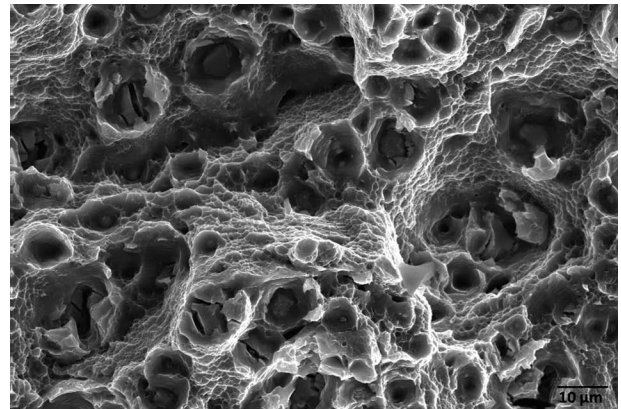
Higher magnified image of the fracture surface shown in Fig. 42
